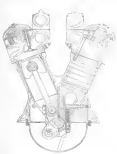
DISASSEMBLED CROSS-SECTION, SIDE VIEW
